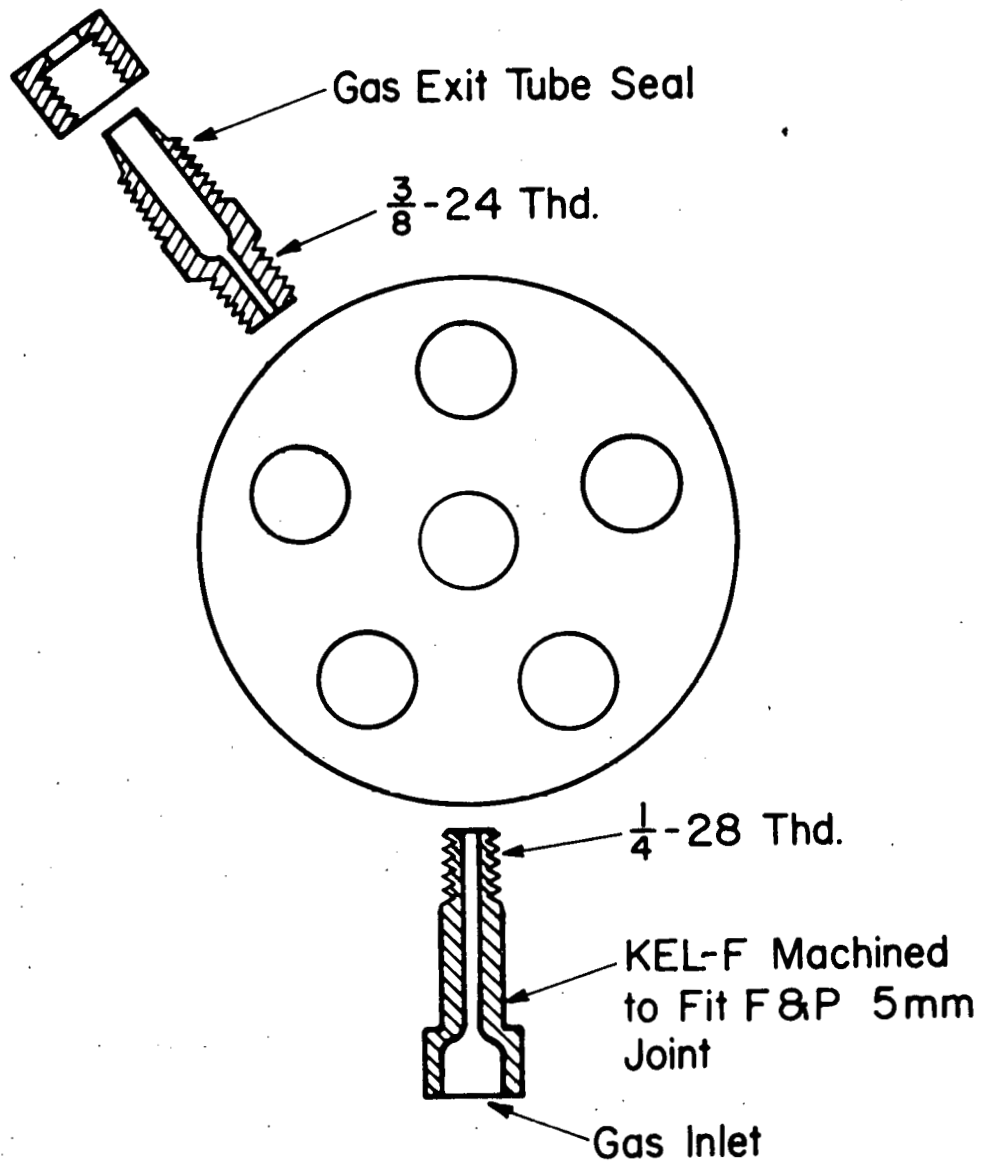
Top view of the cell cap. The six holes are for the six tubing seals. Gas inlet and exit ports are on the side
